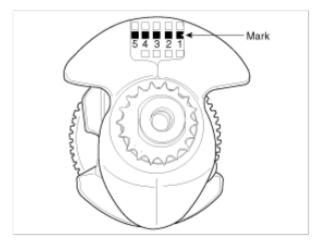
Crankshaft Main Journal Mark Location Courtesy of HYUNDAI MOTOR AMERICA
